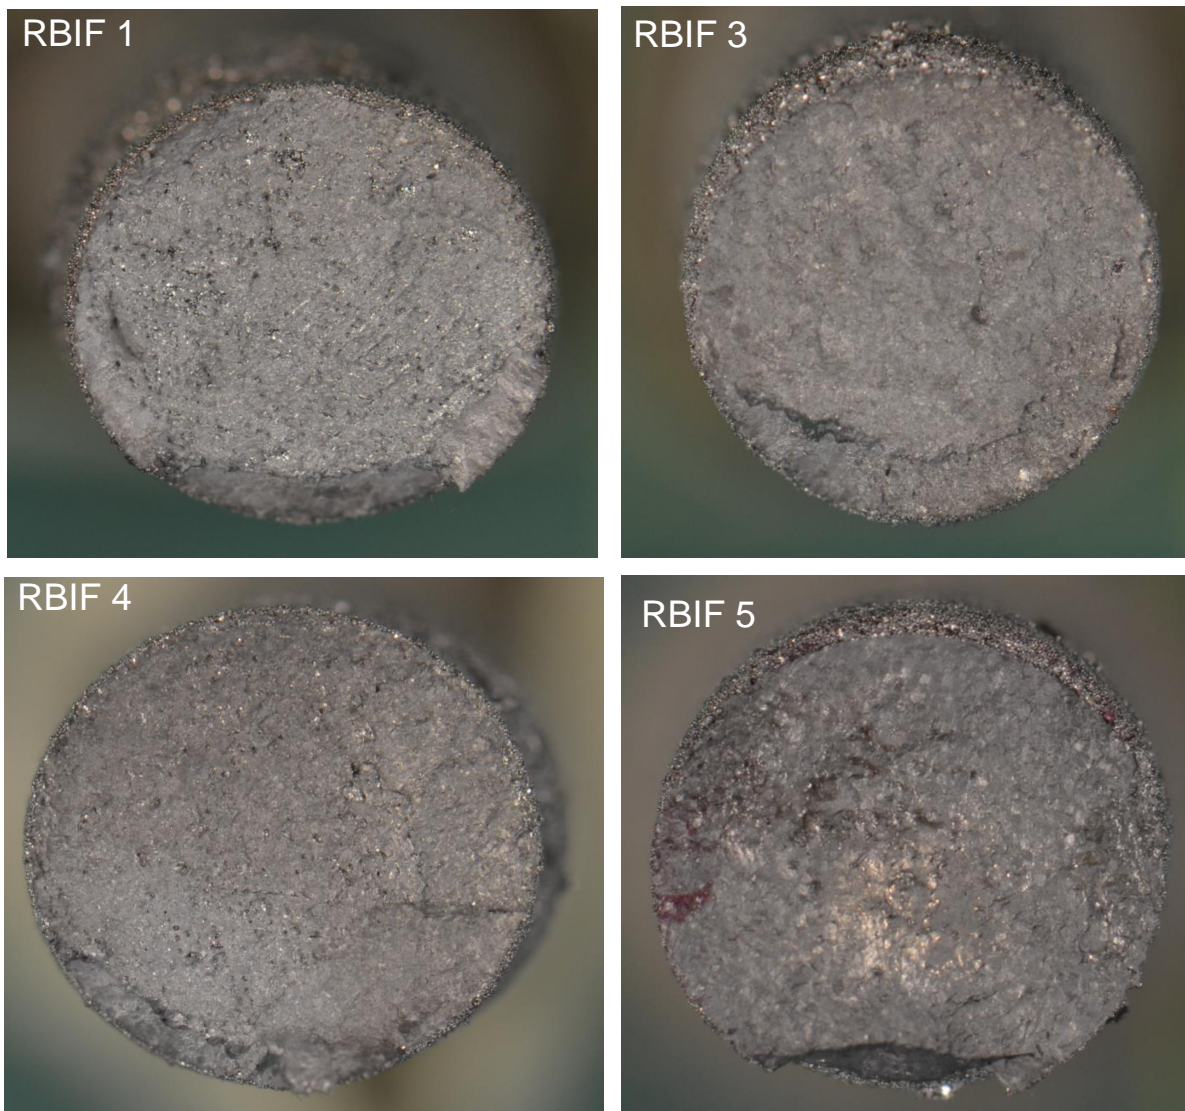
Fracture Surface Photographs of RBIF Specimens 1, 3, 4 and 5
